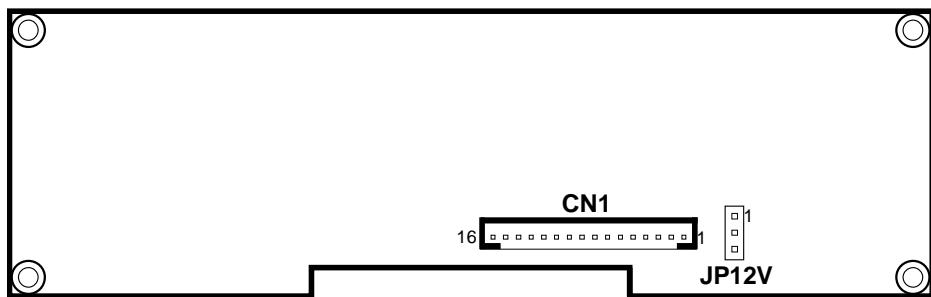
MB-4103 & LD720 VFD Board Component Locations
